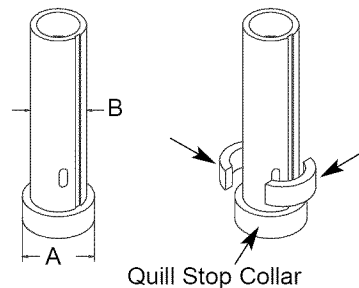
Measuring Quill; Locating Two-piece Bushings
